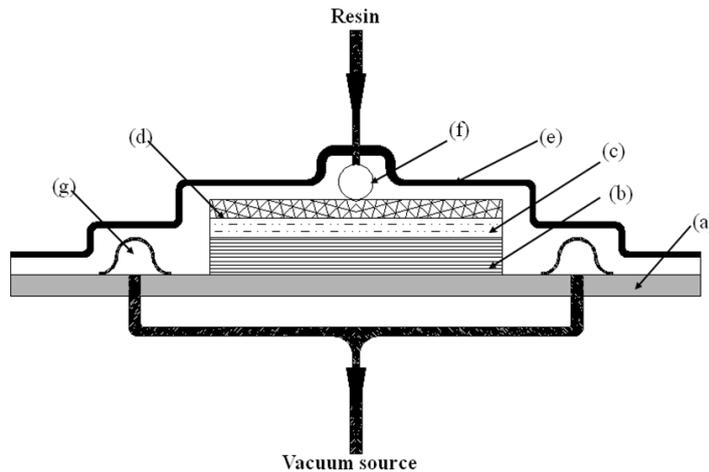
Schematic of VARTM setup (a) Granite molding tool, (b) Dry Basalt fabrics, (c) peel ply and breather material (d) distribution medium, (e) Vacuum bag (f) resin inlet (g) vacuum outlet.
